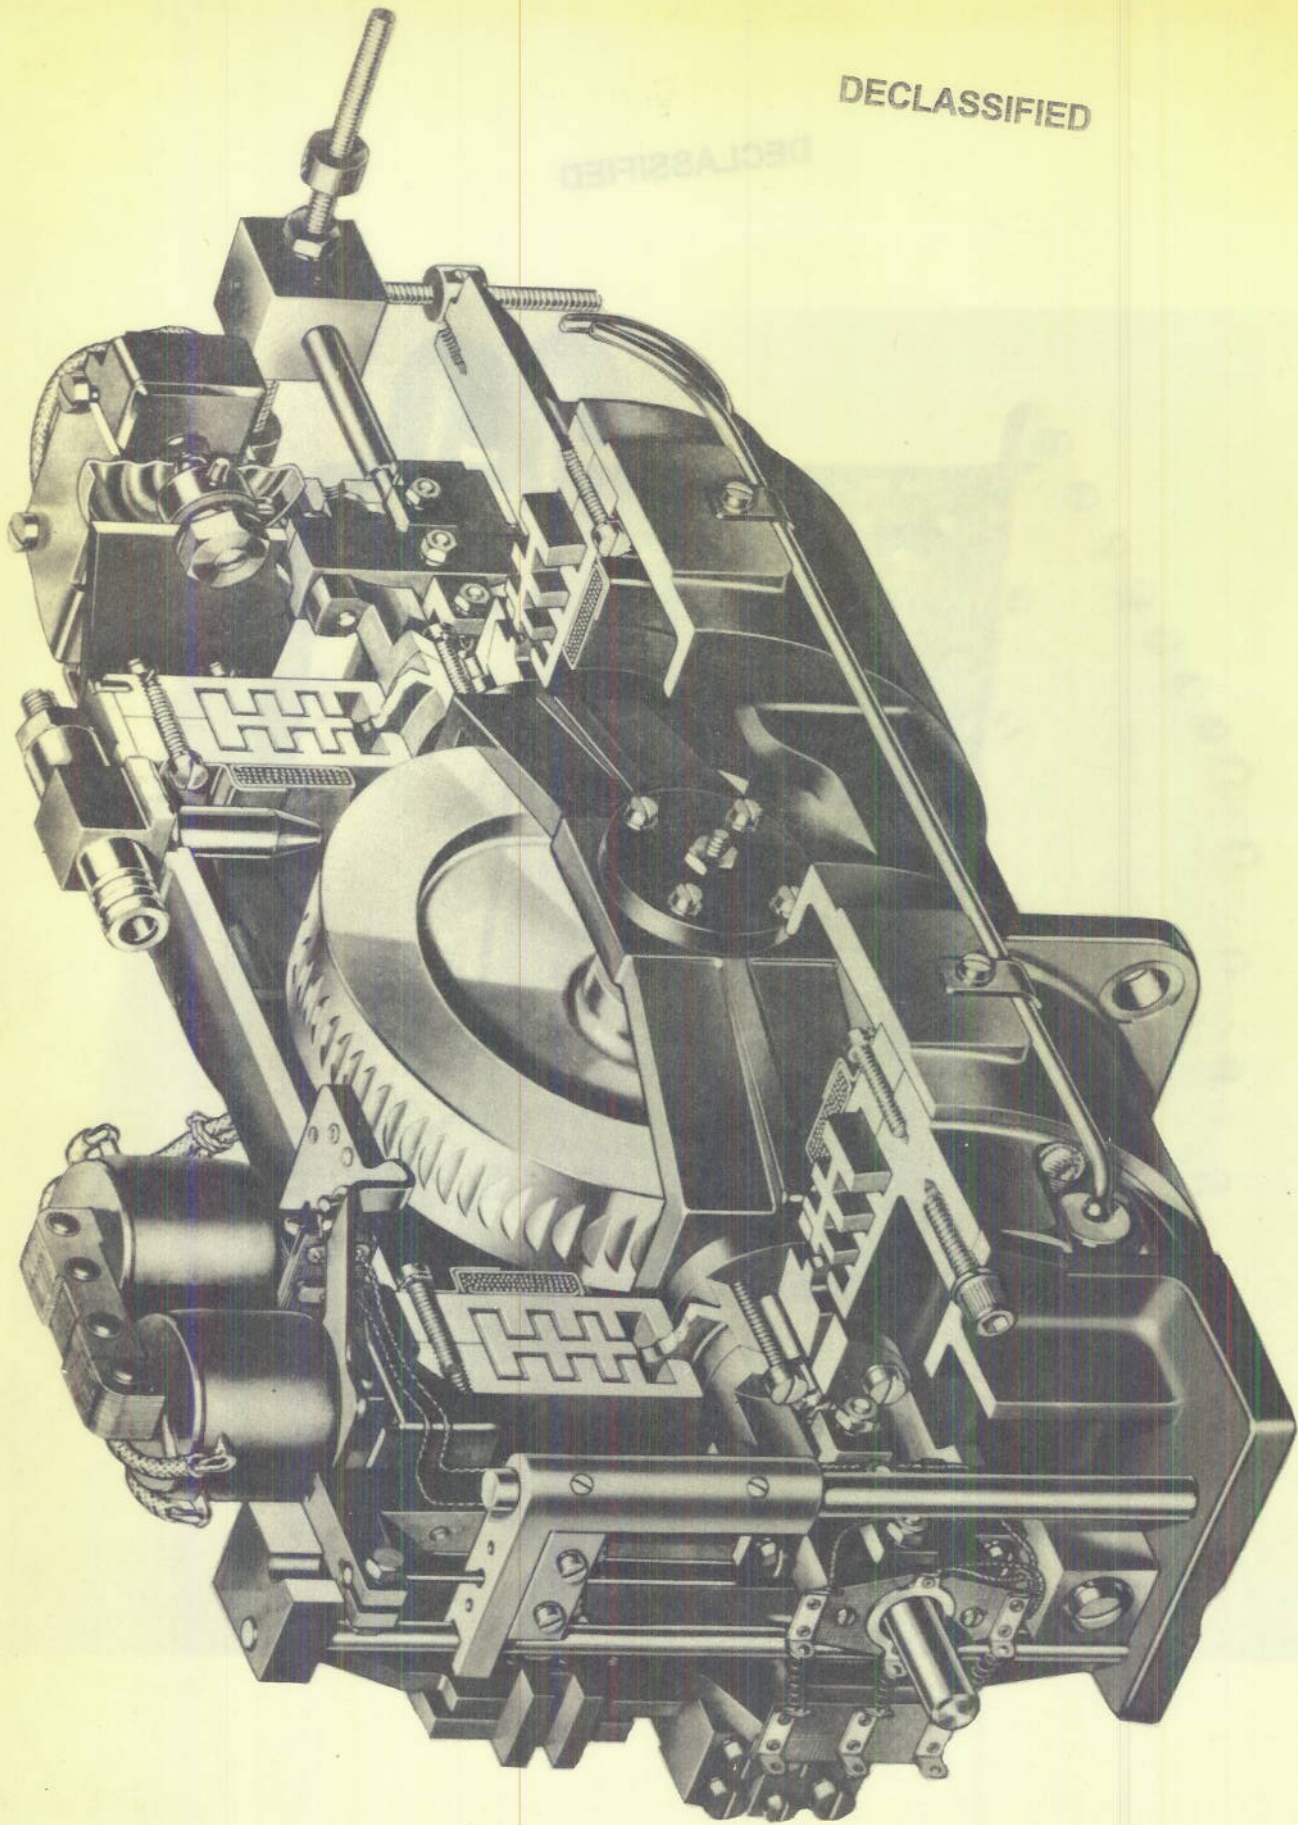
Elevation Gyro of Stabilizer Mk 1.
